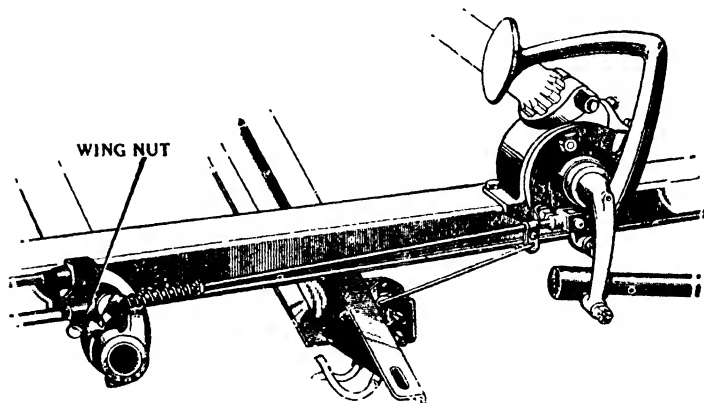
PRIOR TO AUGUST, 1936, THE MAIN ADJUSTMENT FOR AUSTIN SEVEN BRAKES WAS A WING-NUT ON THE PULL-ROD OPERATED BY THE PEDAL
